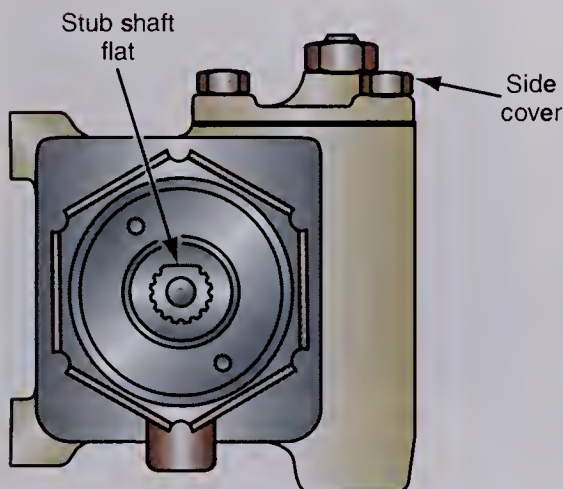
Stub shaft flat facing upward and parallel with the side cover.
